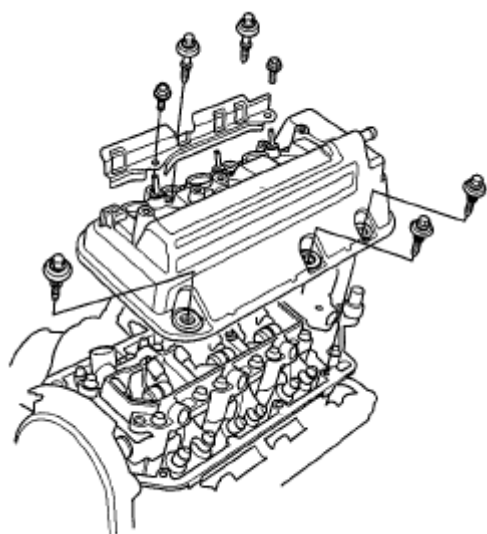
Identifying Rear Cylinder Head Cover And Clips
